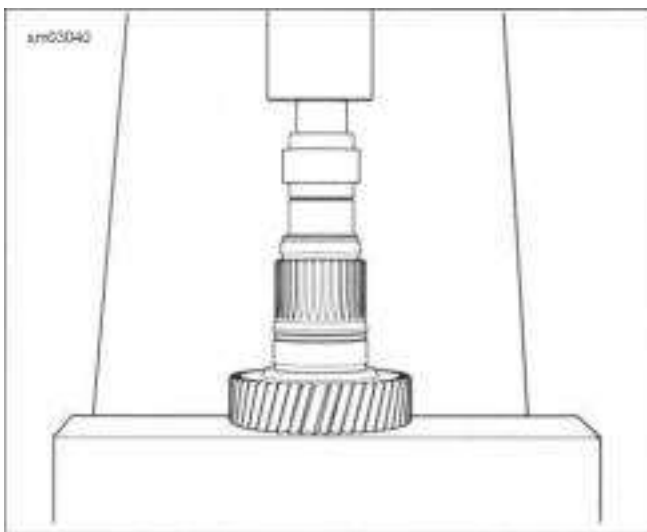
Installing Outer Needle Bearing in Main Drive Gear
